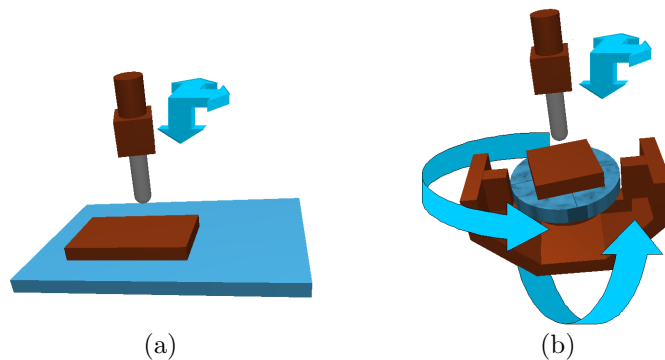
A three axis machine (part (a)) and a five axis machine (part (b)) [10].
